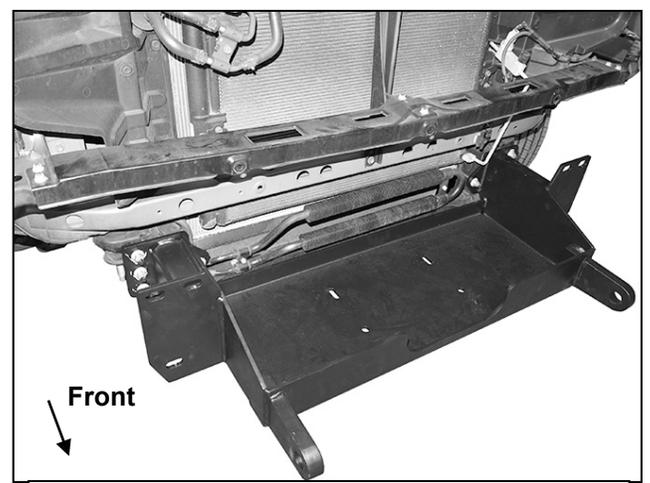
Reuse tow hook bolts (arrow) to attach passenger/right Support Bracket to bottom of frame
